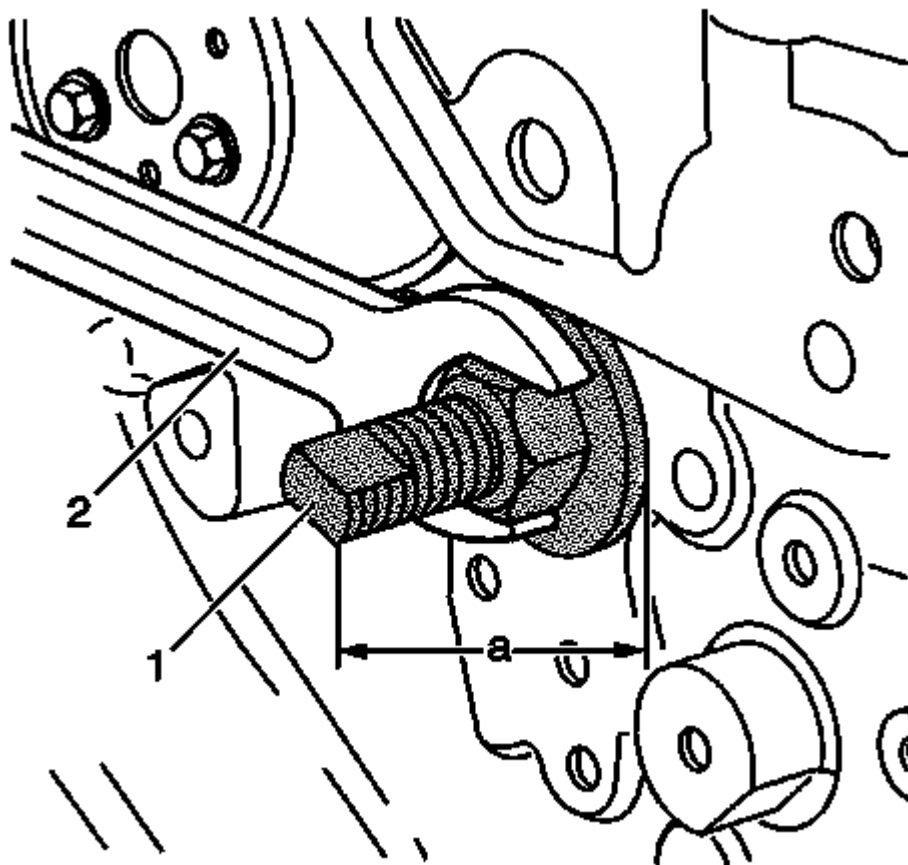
Turn Special Tool EN-43650 Remover So Foot Becomes Perpendicular To Shaft
